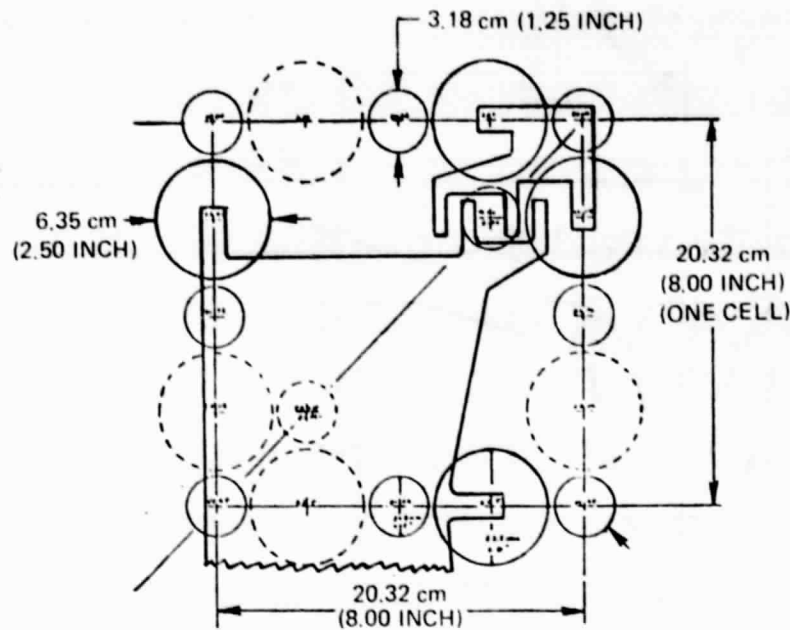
MINIMUM FOLDED CELL SECTION WITH WIDE AREA PLATFORM STRUTS
